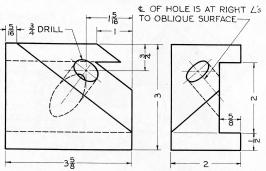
Holder Block. Draw given views and primary and secondary auxiliary views so that the latter shows true shape of oblique surface (Lavout B-4).
